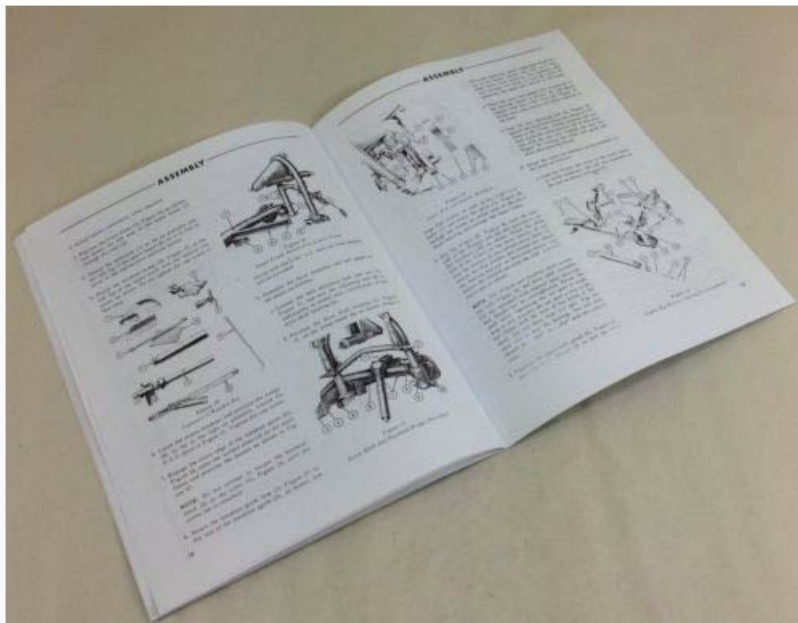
Pages illustrating the assembly process for the mower, including various components and attachment points.
